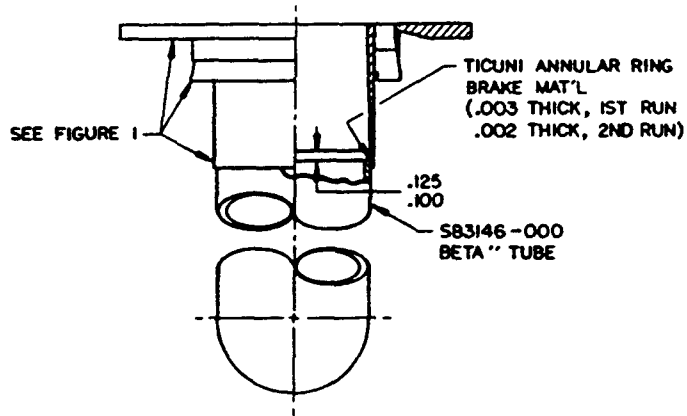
(HEADER AND TUBE ASSEMBLY)
